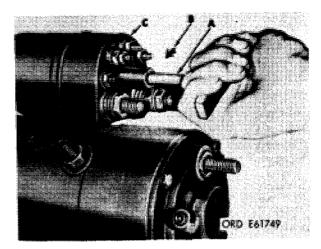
Disconnecting or connecting relay adjusting shaft using shaft adjusting tool.
